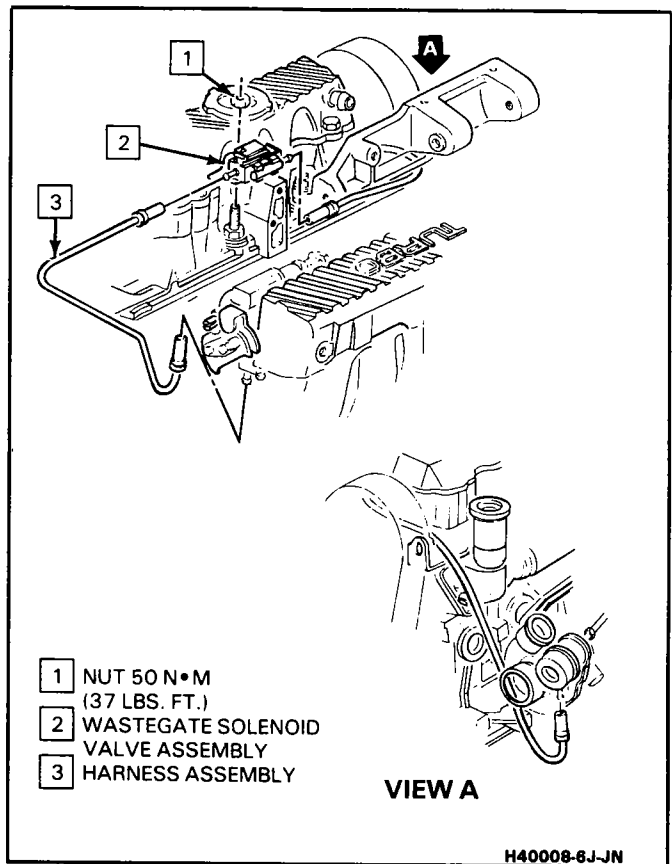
Wastegate Solenoid Valve Assembly & Harness
